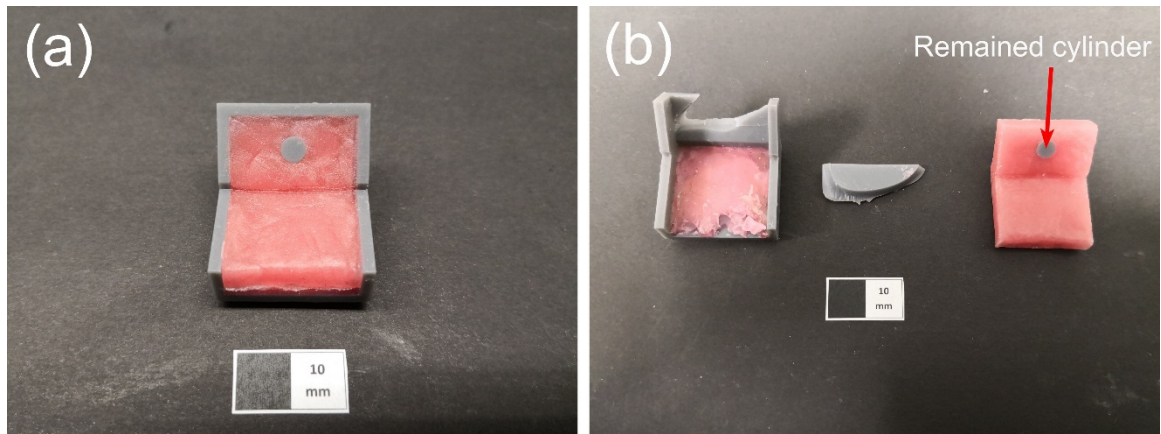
The cured test blocks cannot be removed from the molds with cylinder design. (a) The test block firmly remained in the mold designed in Figure 20a; (b) Excessive removal force resulted in the mold fracture, the cylinder remained in the test block (red arrow) (white scale: 10 mm).
